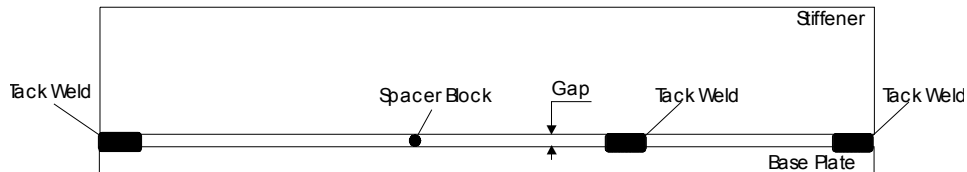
Test piece for establishing a welding procedure for an IPM.
